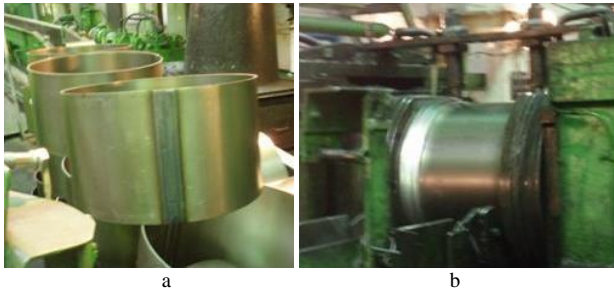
The expansion process of the welded workpieces: a – view of the workpiece with a weld seam; b – the process of expansion (crimping) of the wheel rim workpiece before the forming
